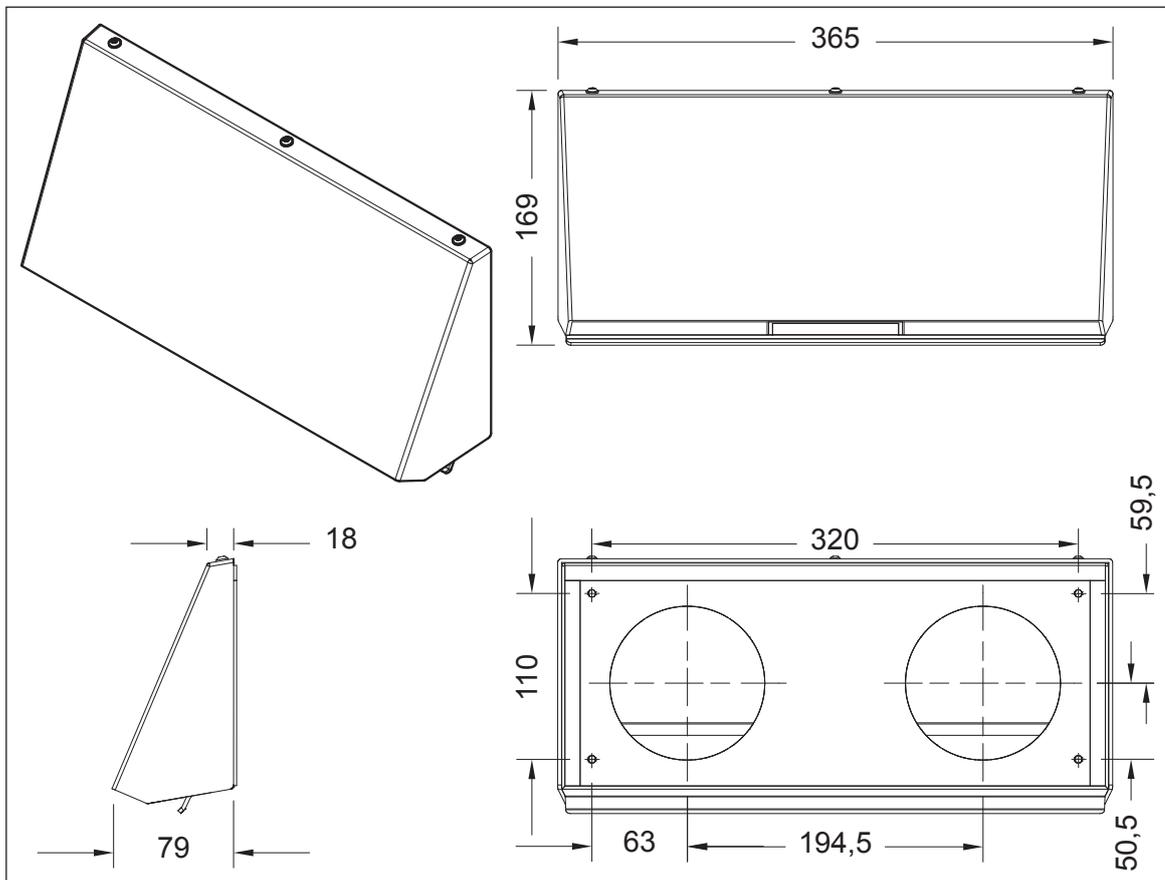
Dimensions of the outer wall terminal stainless steel pod M-WRG-II ES (-P, -PK), dimensions in millimetres
